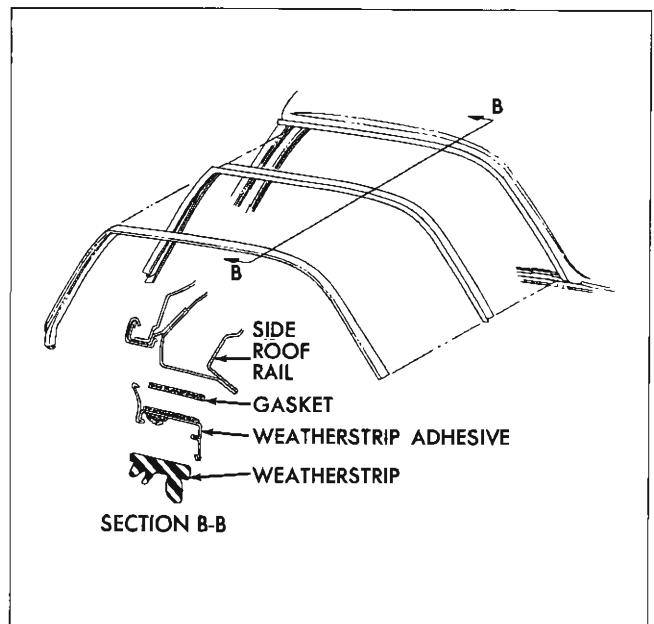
Side Roof Rail Weatherstrip - 47 Style
